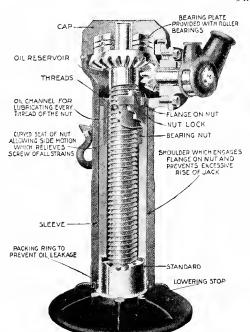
Geared Screw Jack. The Joycε-Cridland Company.
